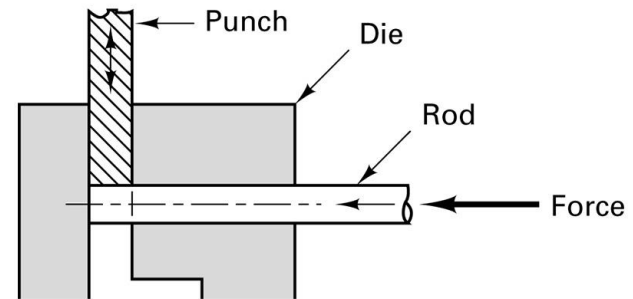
Method of smooth shearing a rod by putting it into compression during shearing.
